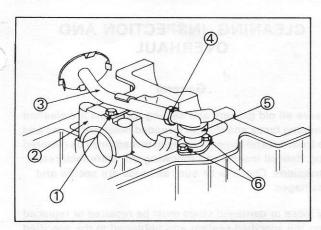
Oil Pump Removal/Replacement - Engines Not Fitted With High Inclination Oil Pans
